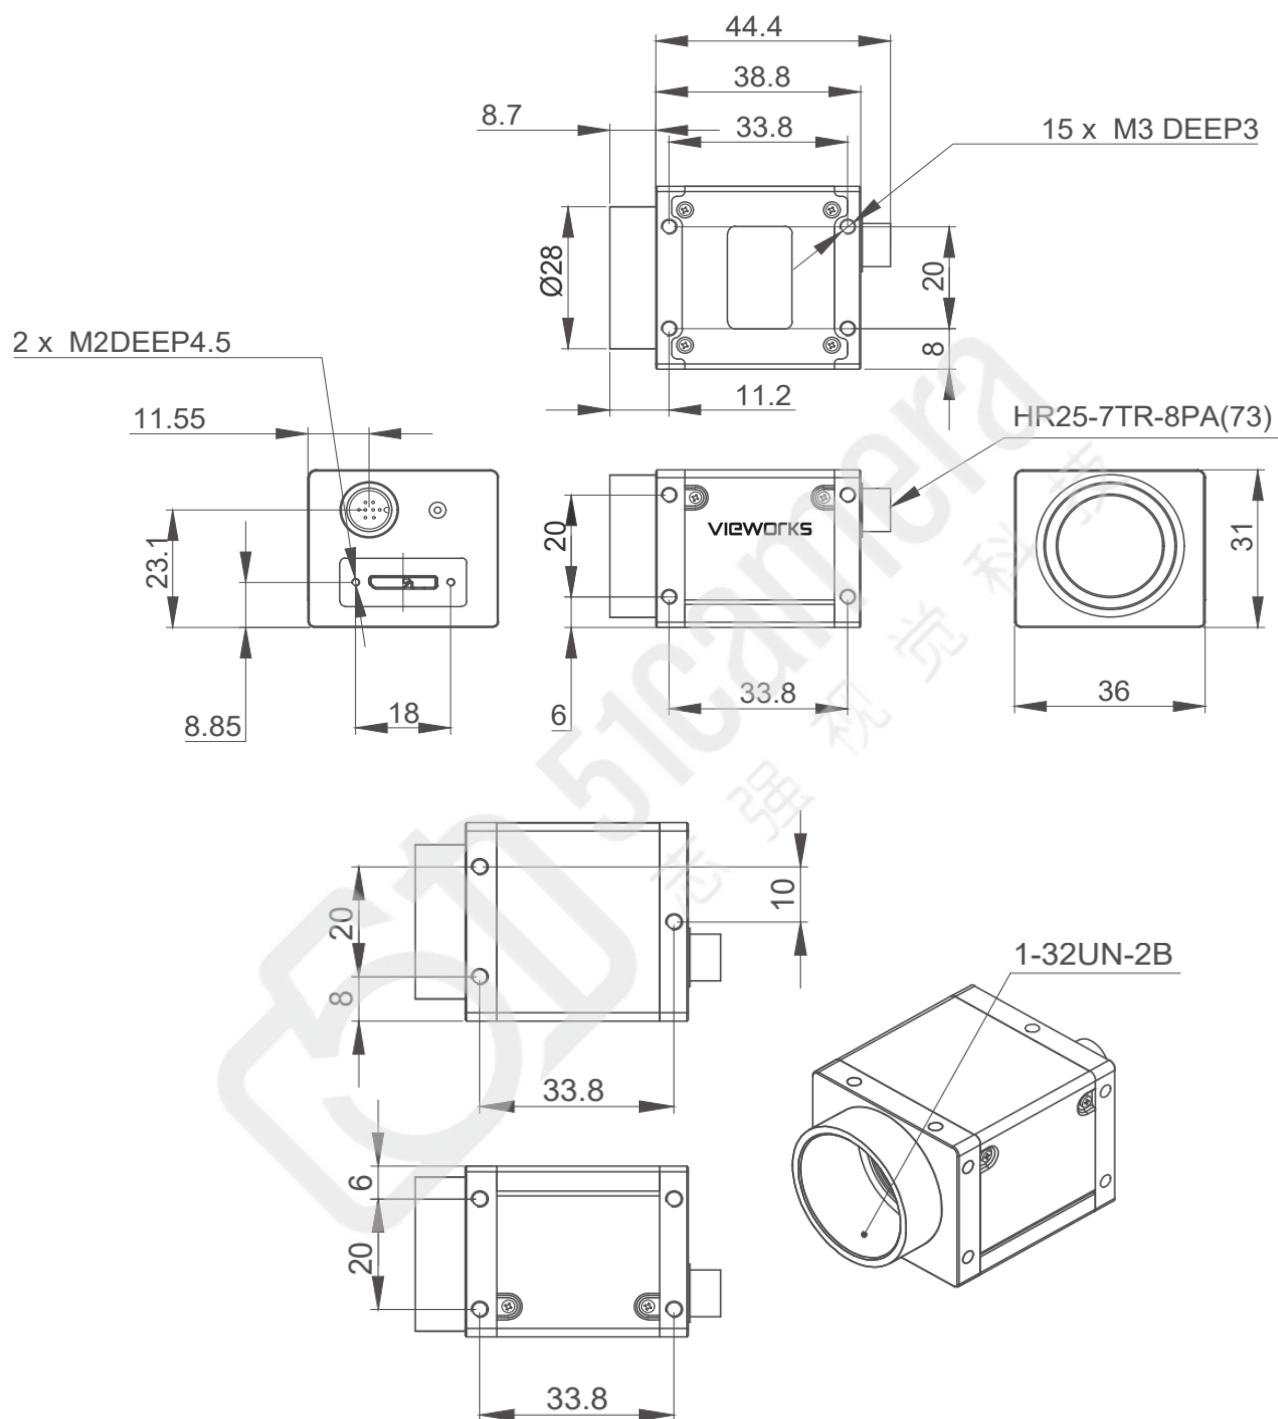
Mechanical Dimension (VZ-12MU-M/C23H00)
